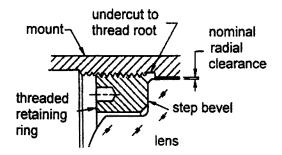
Details of a step bevel providing space for a threaded retaining ring.
